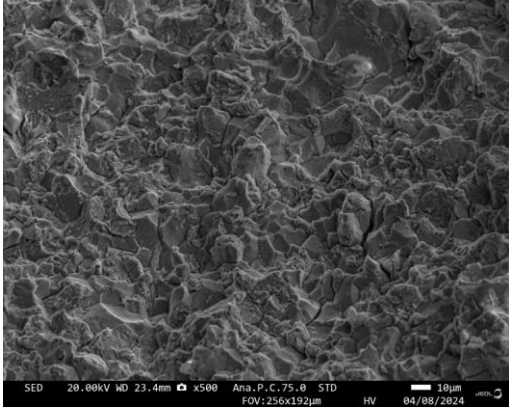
Fracture surface bolt B near edge, brittle intergranular cracking. Fracture surface bolt B near edge, ratchet marks.
